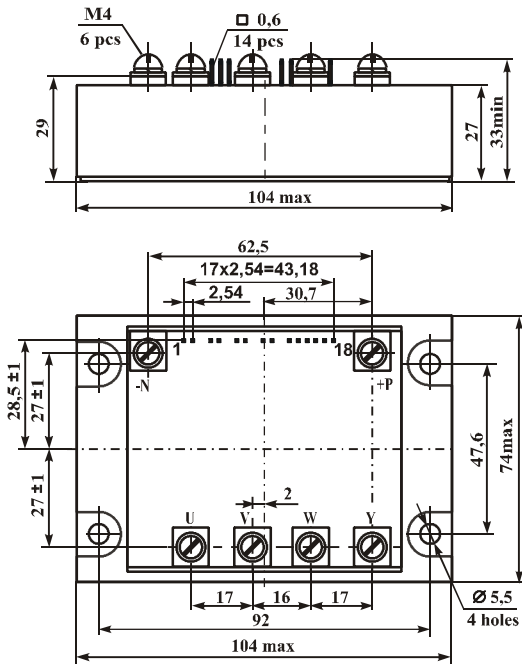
Overall drawing of modules M13C-10-6(12)
